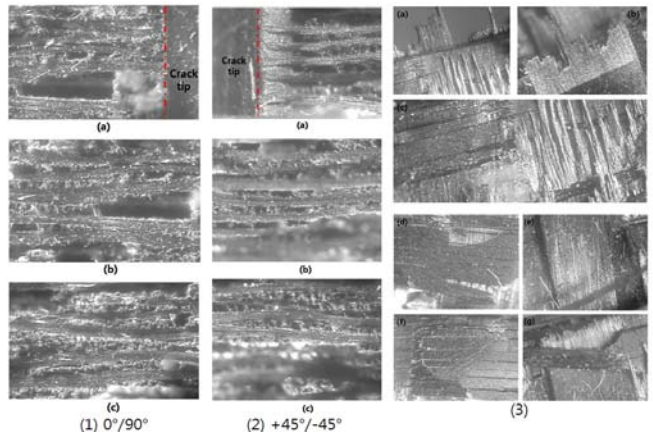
Appearance of fatigue fracture surface ( 0°/90°, +45°/-45° )
